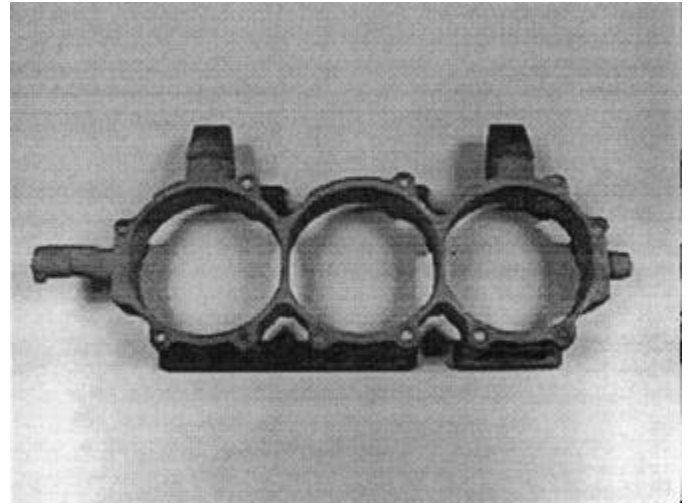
Engine block water jacket core for the Chrysler V6 aluminum engine.
